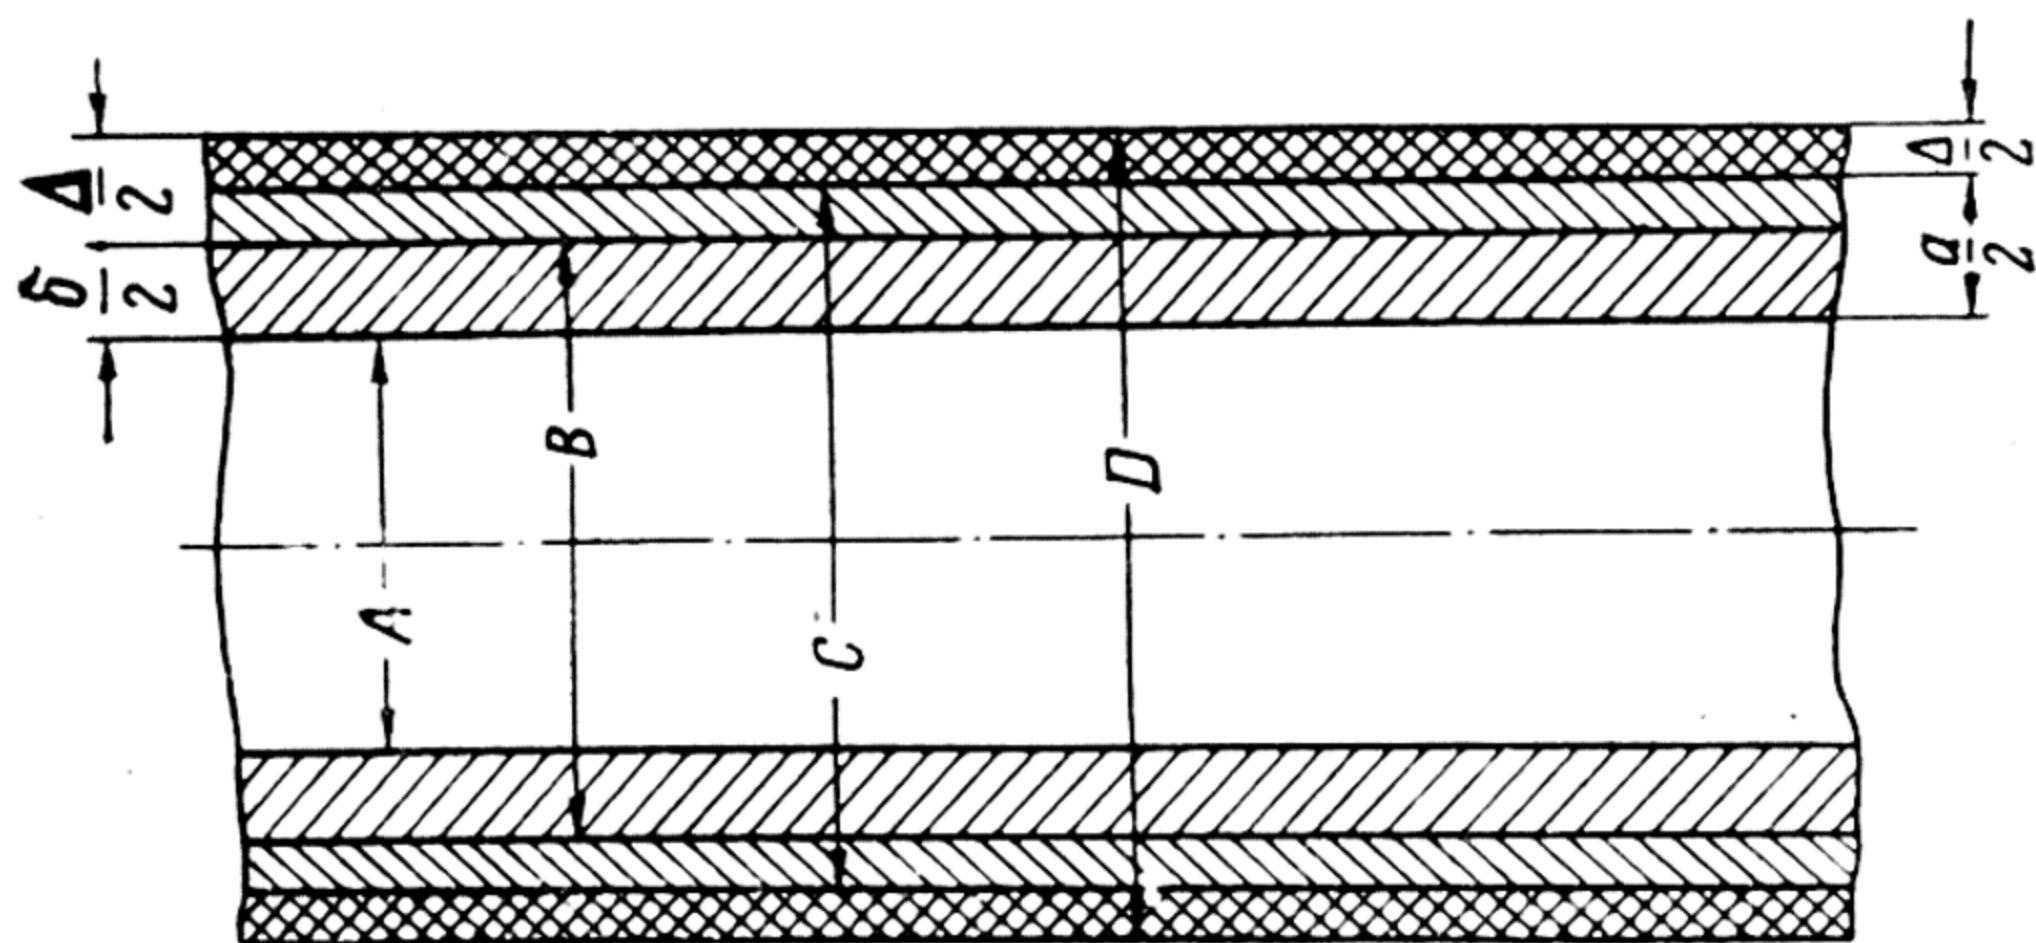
Location of allowances and tolerances of external dimensions of a forged part
